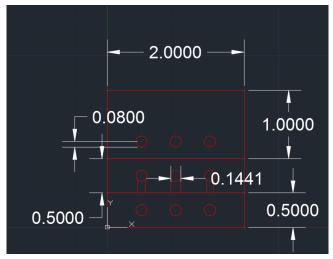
Stepper Plates AutoCAD Drawing, Dimensions in Inches
